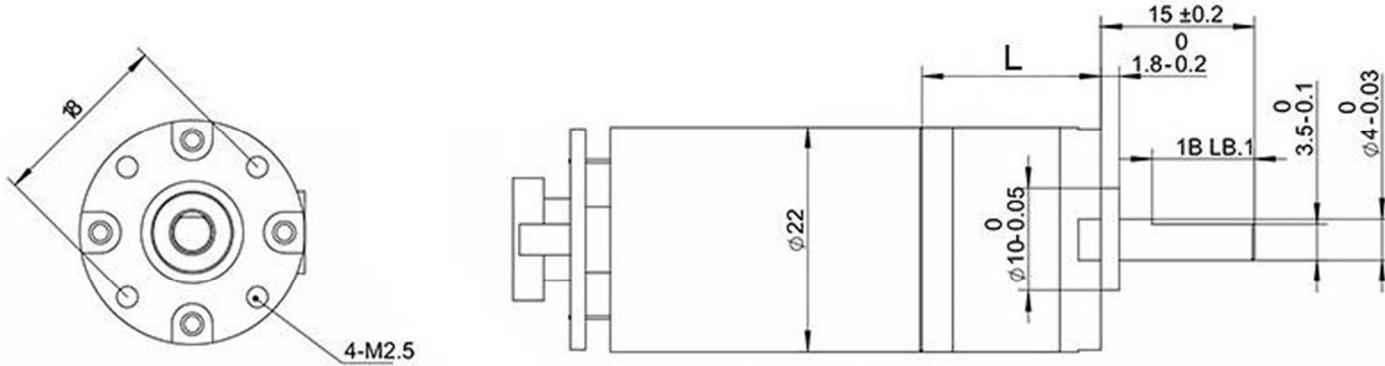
Manufacturing Drawing of part SS#2-P#4 – DC Gearmotor
